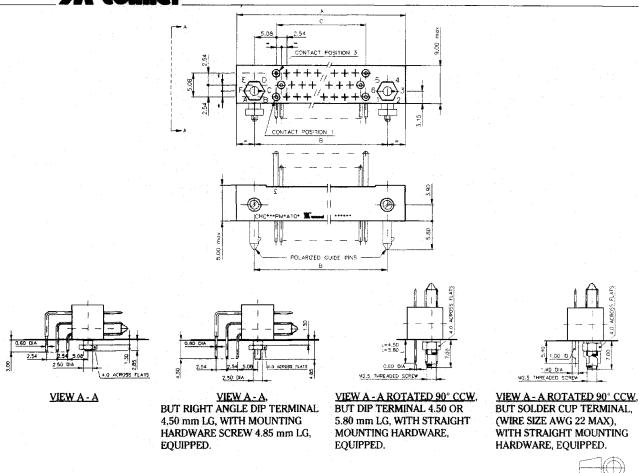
PLUG CONNECTOR: 26, 44, 62, 80, AND 98 PIN CONTACT POSITIONS, 100 INCH SPACING (2.54 mm), DIP SOLDER (RIGHT ANGLE OR STRAIGHT), AND SOLDER CUP TERMINAL STYLE.
